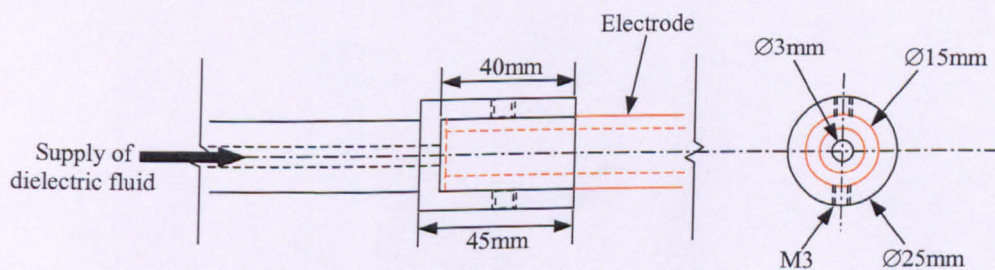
Sketch of the enclosed EDM chuck and mounted electrode
